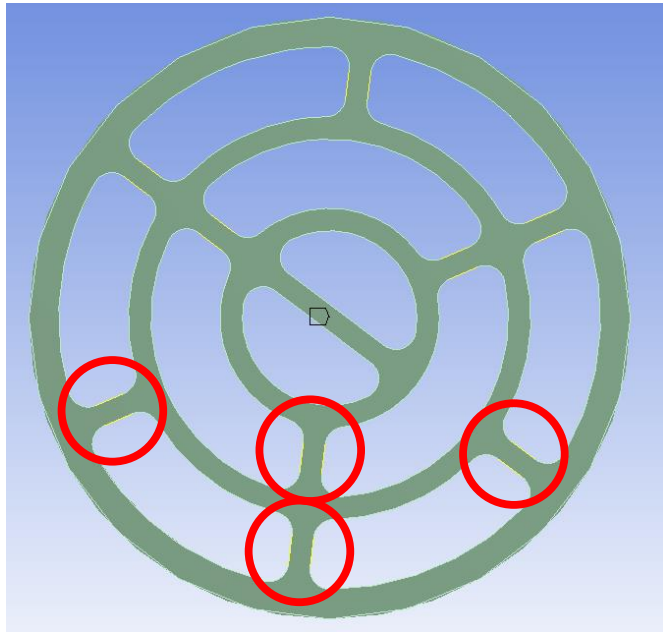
Test 6 - one endplate faced fixed, lower 4 webs fixed
